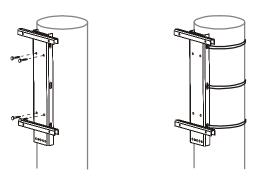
ARU Mounting Bracket Options (screw mount or steel band mount)
